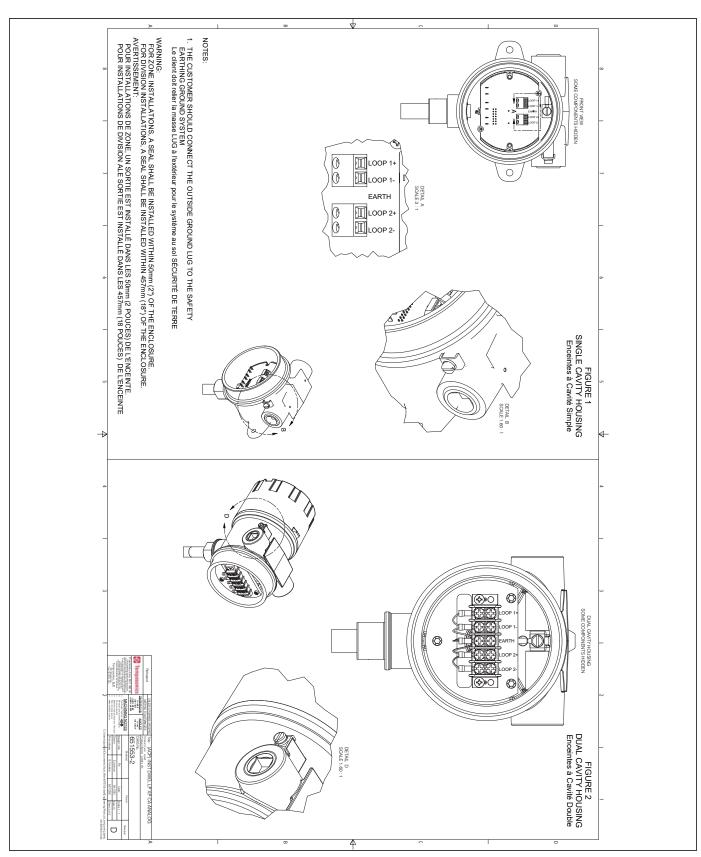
Explosionproof, FMC Installation Drawing, HART®, Page 2
